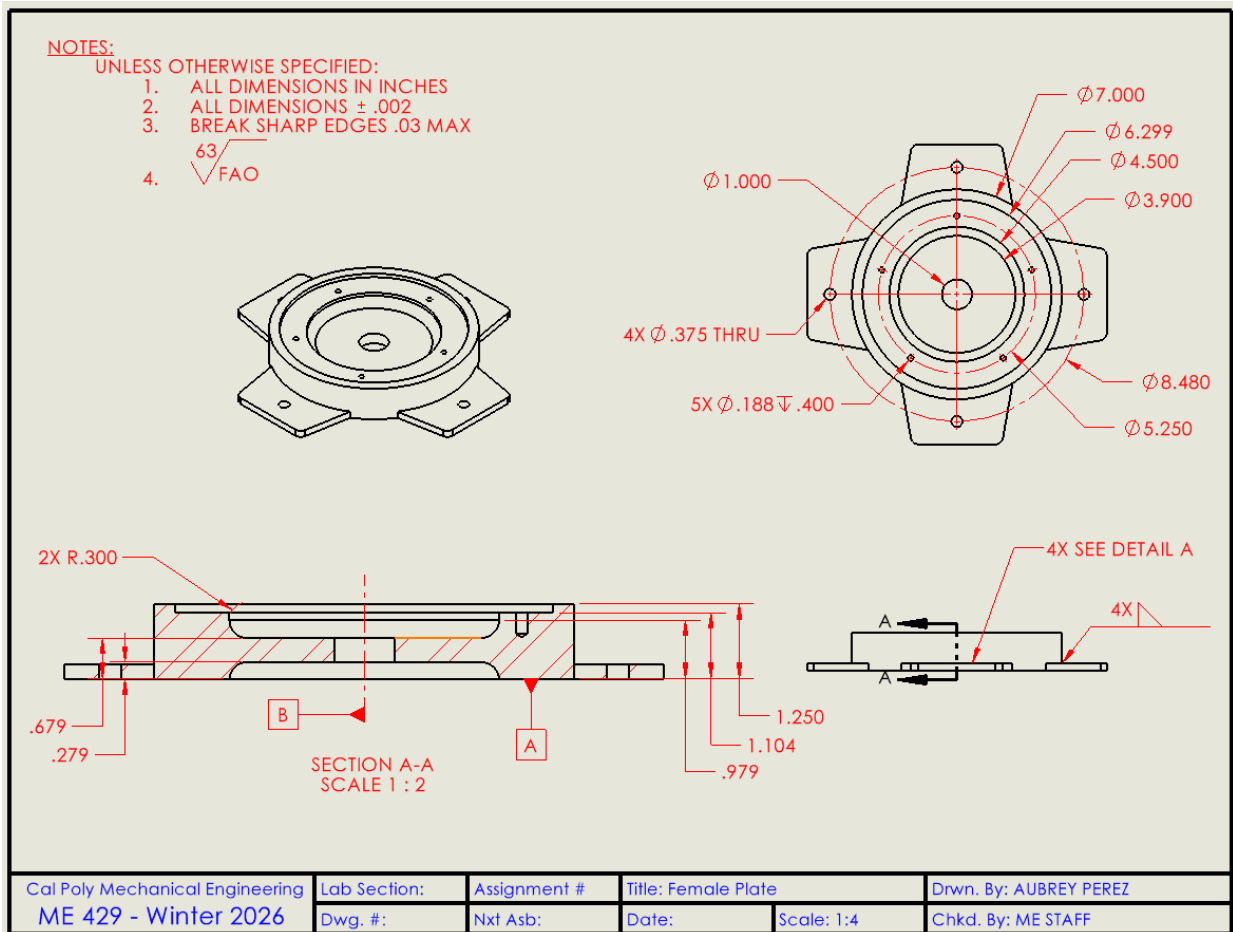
Detailed drawing of Female Plate for assemblies 1000 and 2000
